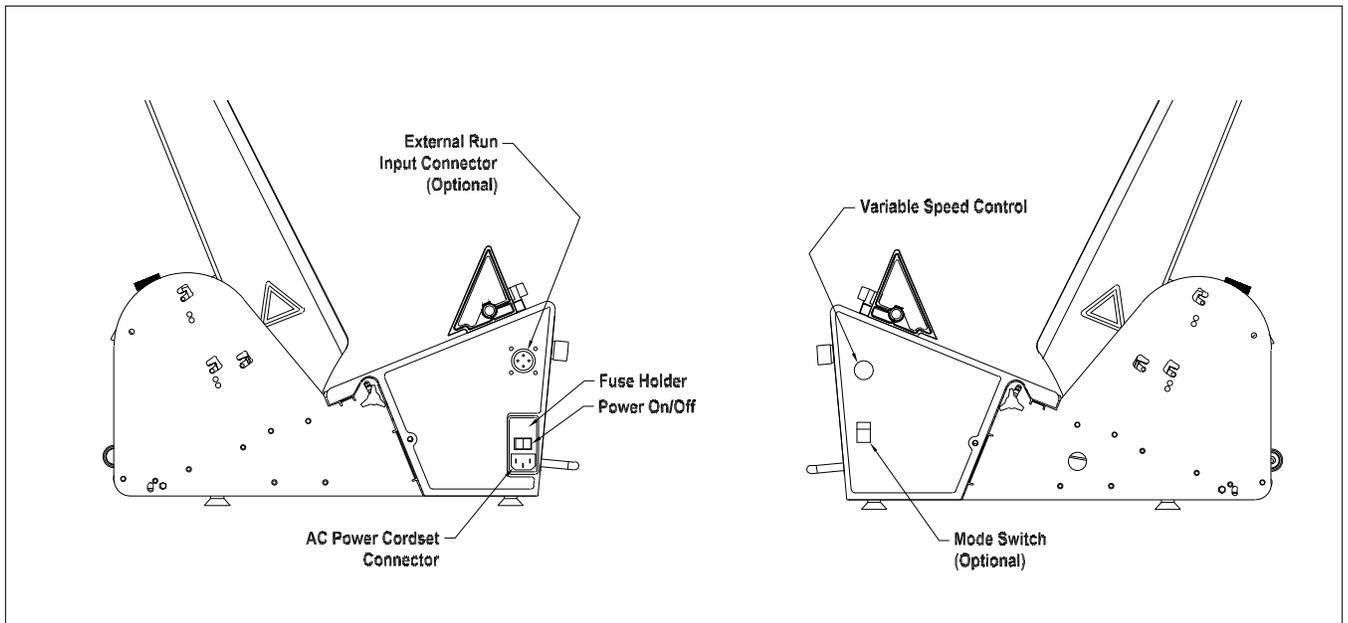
A. Control Panel Components (Left and Right Side Views)
